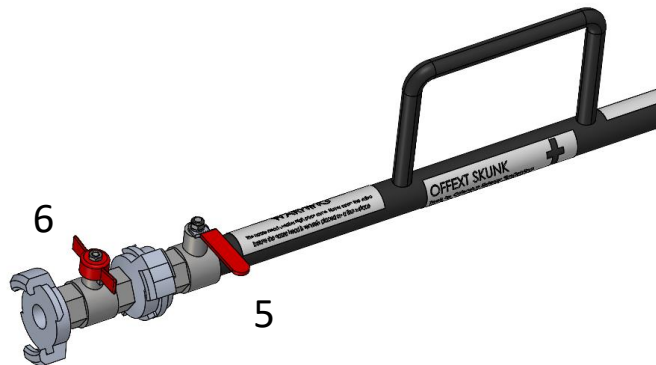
Cut off valve unit (6) attached to the Operating valve (5).
